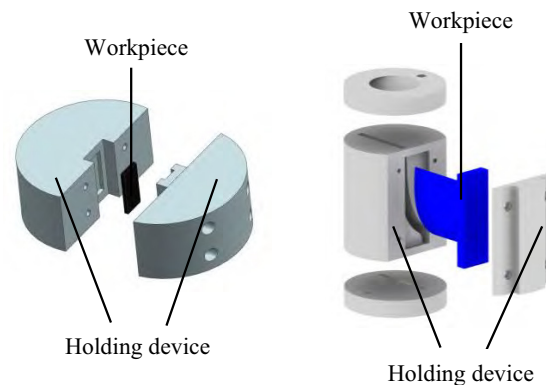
CAD Model of workpiece and holding device for reference workpiece (left) and turbine blade (right)
